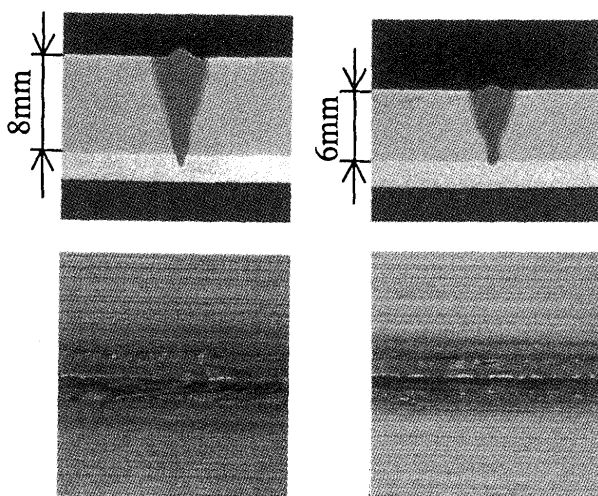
Cross-sections of welds performed using LPLAC welding at different currents and at a constant arc voltage of 26V.
